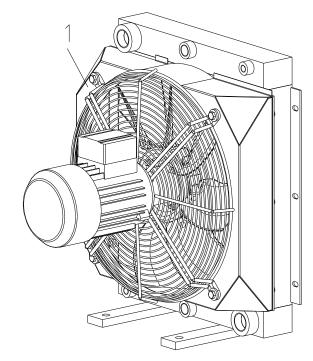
Oil/air cooler; example: OAC200 to OAC2000
